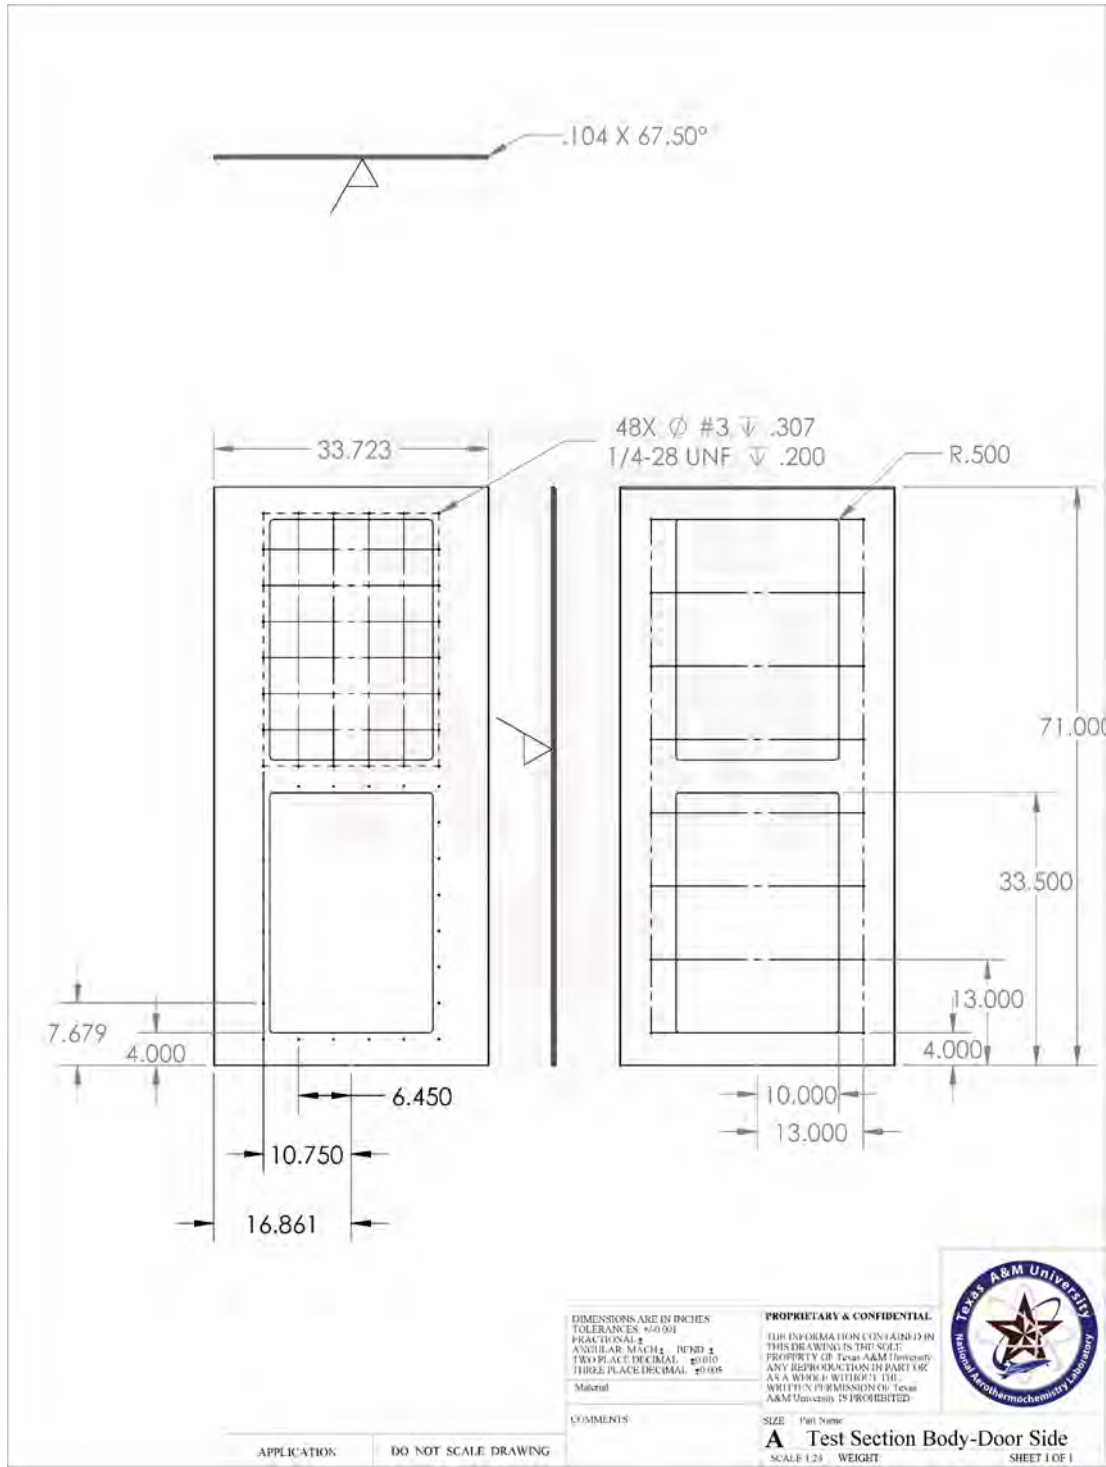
DIMENSIONAL DRAWING FOR THE DOOR PLATES OF THE TEST SECTION SKELETON.
